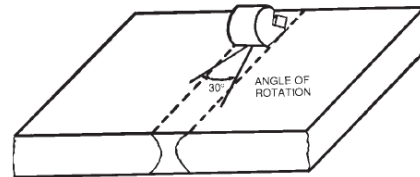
Supplementary Technique 2, for Examining Butt Welds for Suspected Cross-Cracking when the Weld Bead is Ground Flush
